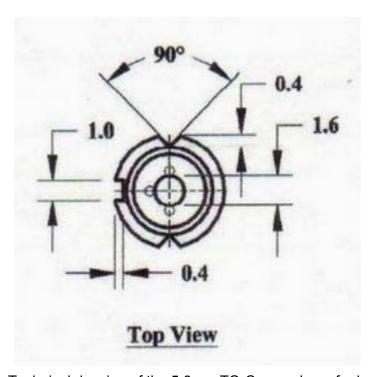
Technical drawing of the 5.6mm TO-Can package for laser diode [
